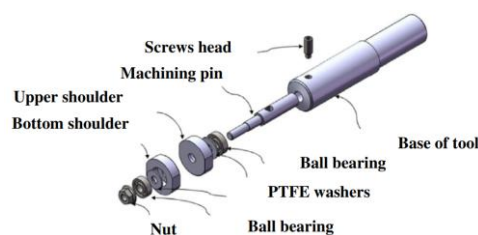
Illustration of the exploded view of the tool used in the SRFSW [40].
